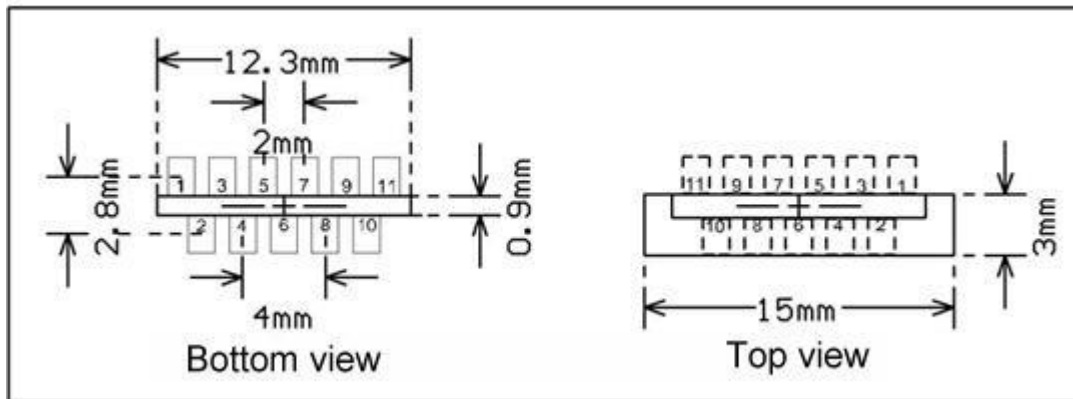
Top and bottom views of the PCB to which WBR2D applies
